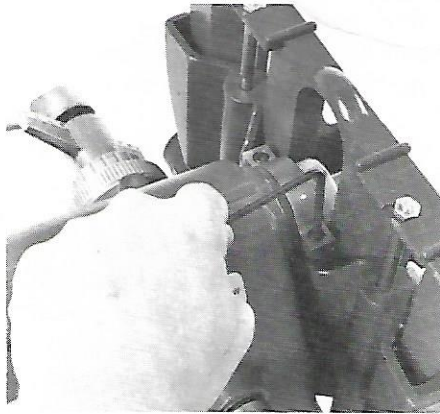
Remember to tighten screws alternately. Exerting unequal pressure on screws may damage the lower guard.
